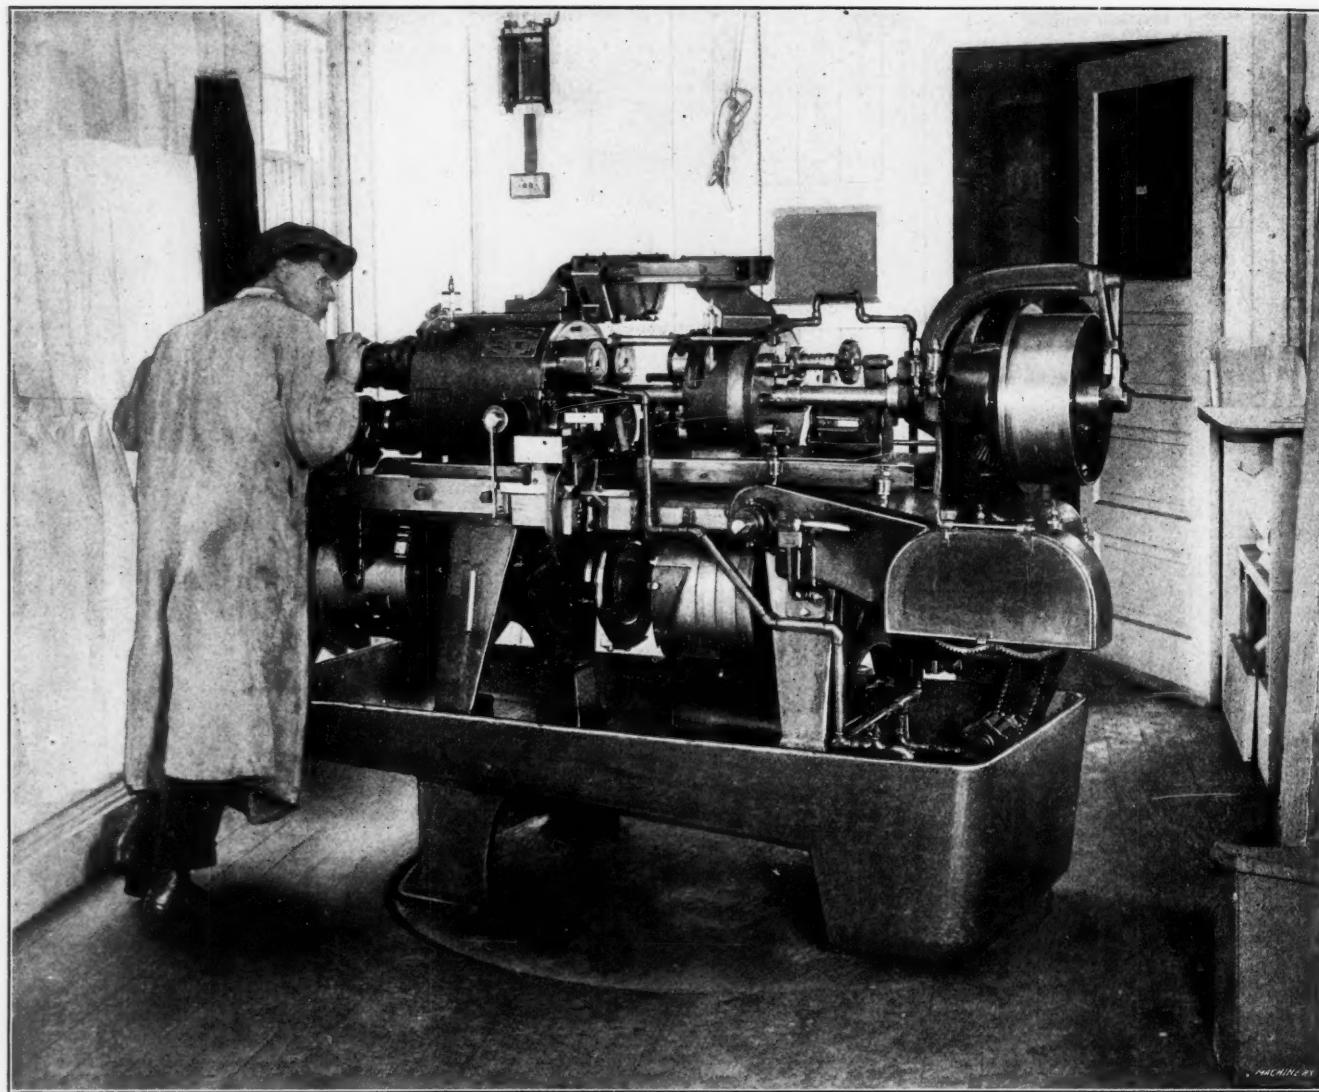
Acme Screw Machine being posed on Turntable for photographing
